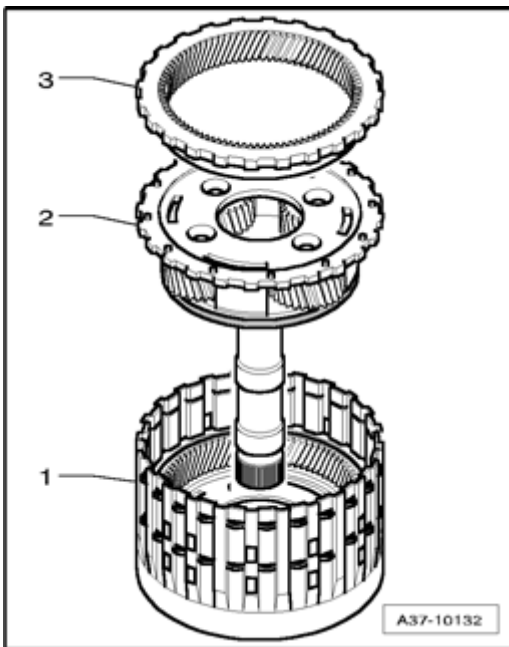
Ring Gear "III", Planetary Carrier "II" And Ring Gear "I"
